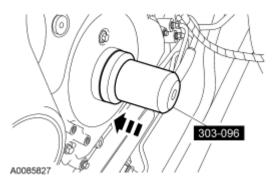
Installing Crankshaft Front Oil Seal Using Special Tool Courtesy of FORD MOTOR CO.
